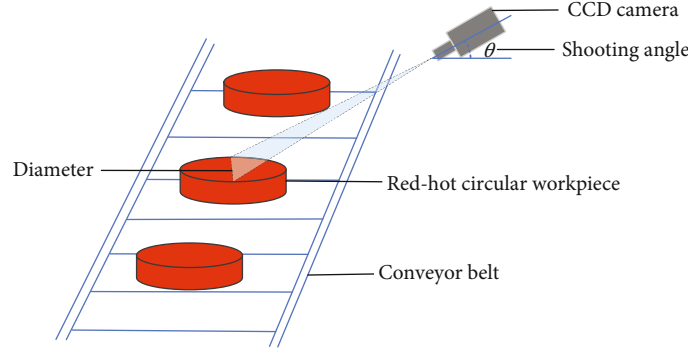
Principle of diameter measurement for red-hot workpieces with CCD camera.
